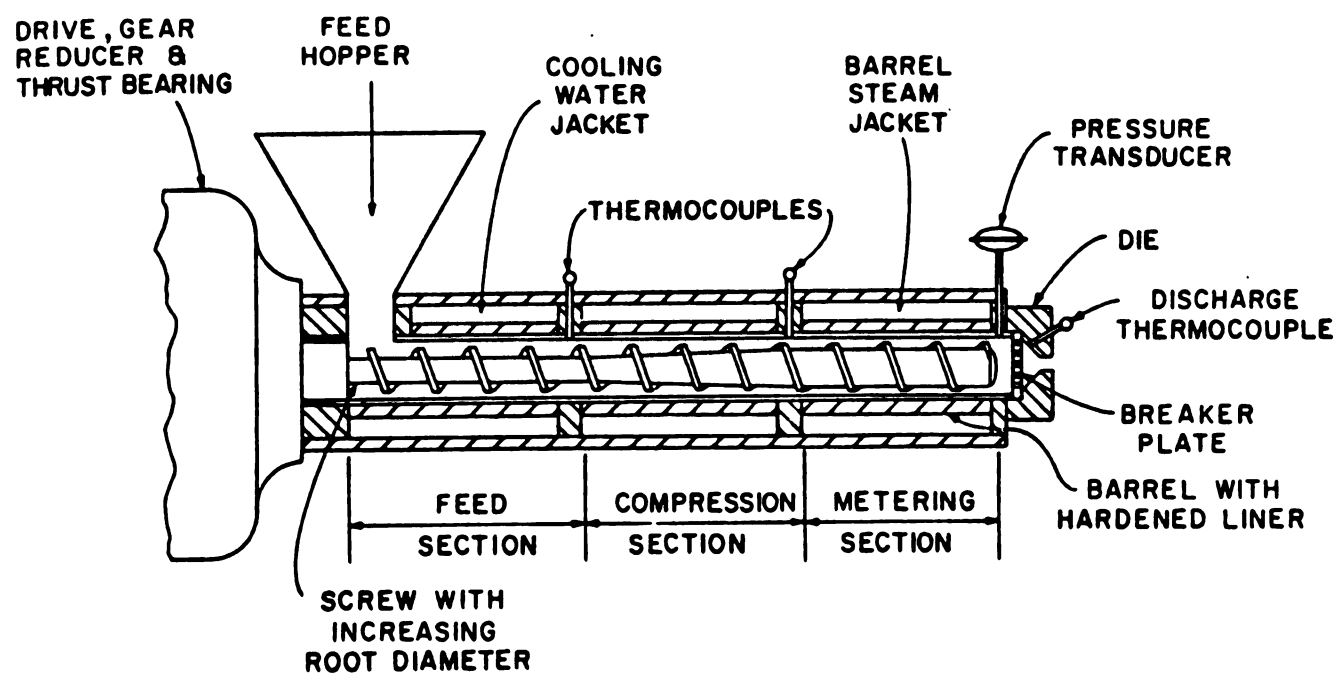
Typical Components of Single Screw Cooking Extruders
